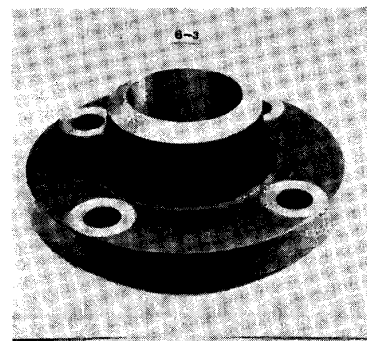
Weld-neck flange hot-forged of SUS304
